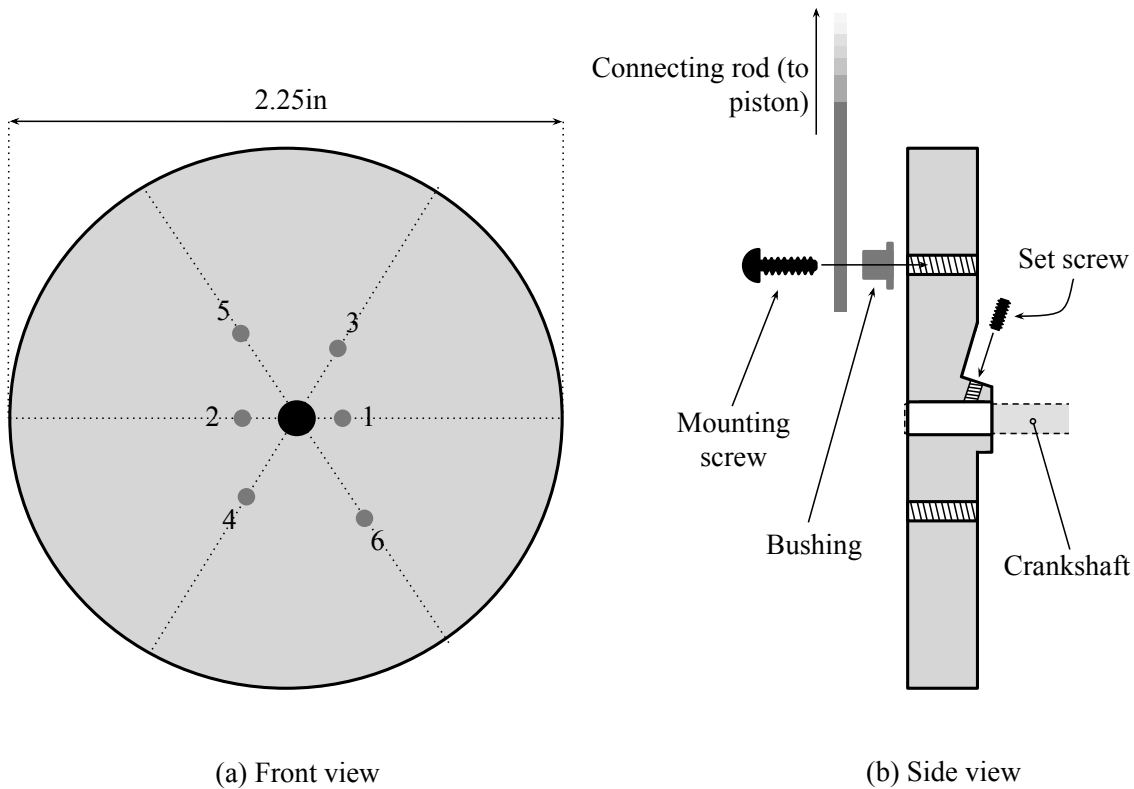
Diagram showing the front and side views of the power piston flywheel (the displacer piston flywheel, not shown, is identical, but with four connecting rod mounting holes instead of six). The mounting holes are positioned such that those of similar radial distance from the center are positioned opposite of each other to improve flywheel balance. Looking at the side view, one can see how the connecting rod is fixed to the flywheel. A hole (not visible) drilled through one end of the connecting rod fits over the bushing and rests against its flange, then a screw is inserted through the bushing and is screwed into the flywheel, holding the bushing in place but allowing the connecting rod to rotate freely.
